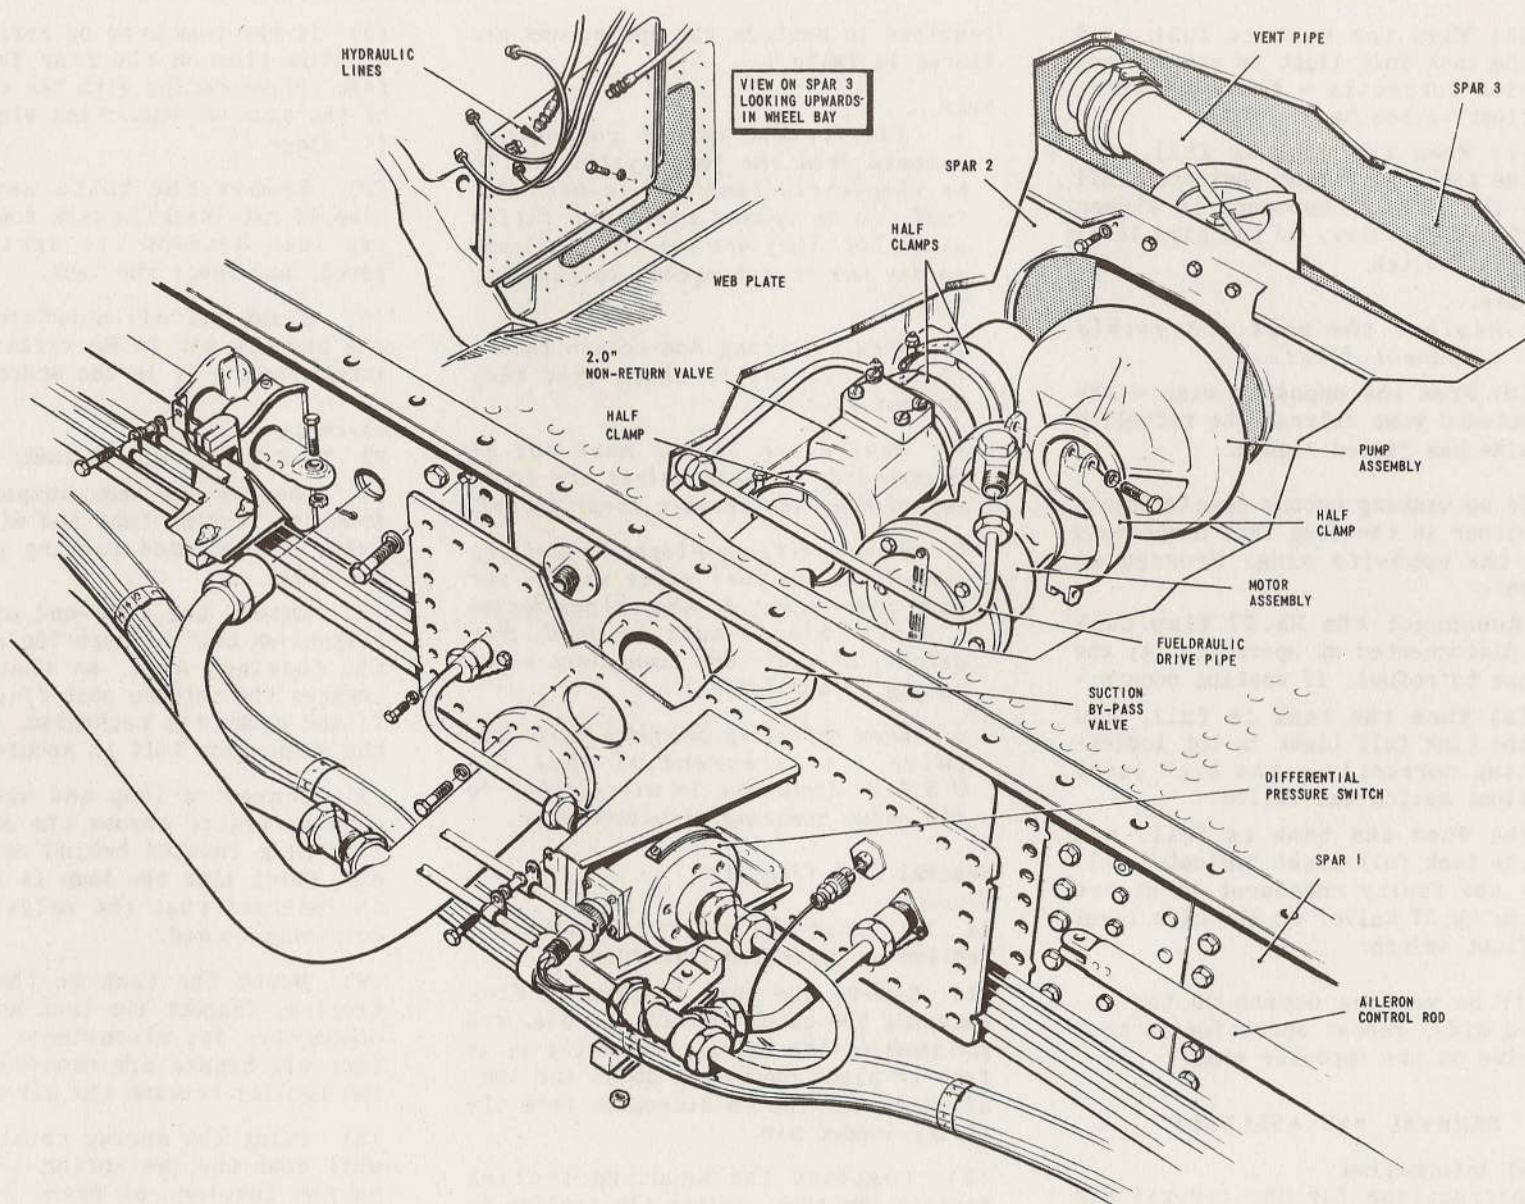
BOOSTER PUMPS - REMOVAL AND ASSEMBLY
